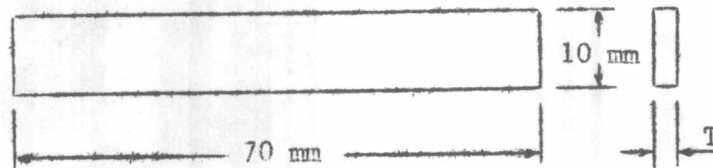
DIMENSIONS OF SPECIFIC GRAVITY TEST SPECIMENS.
